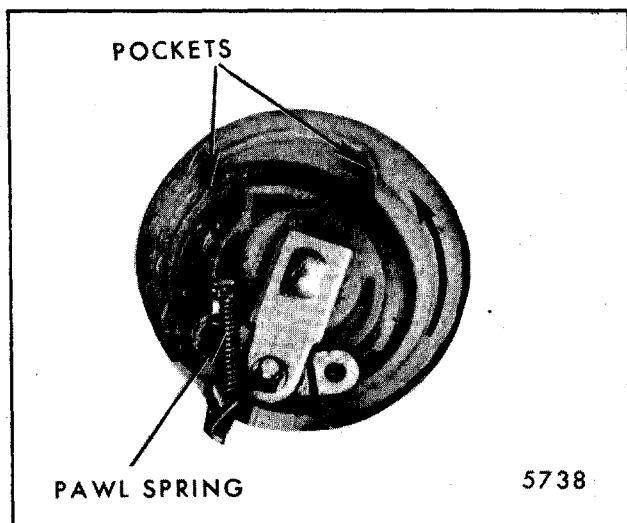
Drive and Lock Pawl Guide Pin Pockets
